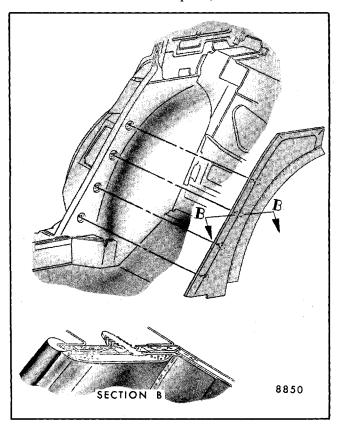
Quarter Lower Trim Attachment - K Style
